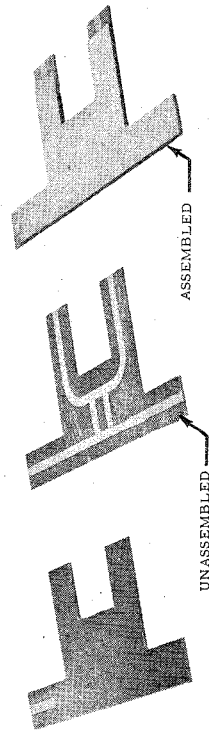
Directional coupler on tri-plate line, assembled and unassembled.
